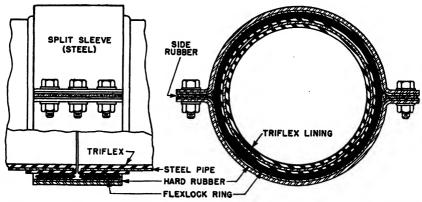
The Flexlock coupling assembly. This split-sleeve pipe coupling consists of two low-pressure gaskets, two side rubbers, two half sleeves, and six bolts. Pipe and sleeves may be either steel or cast iron.
